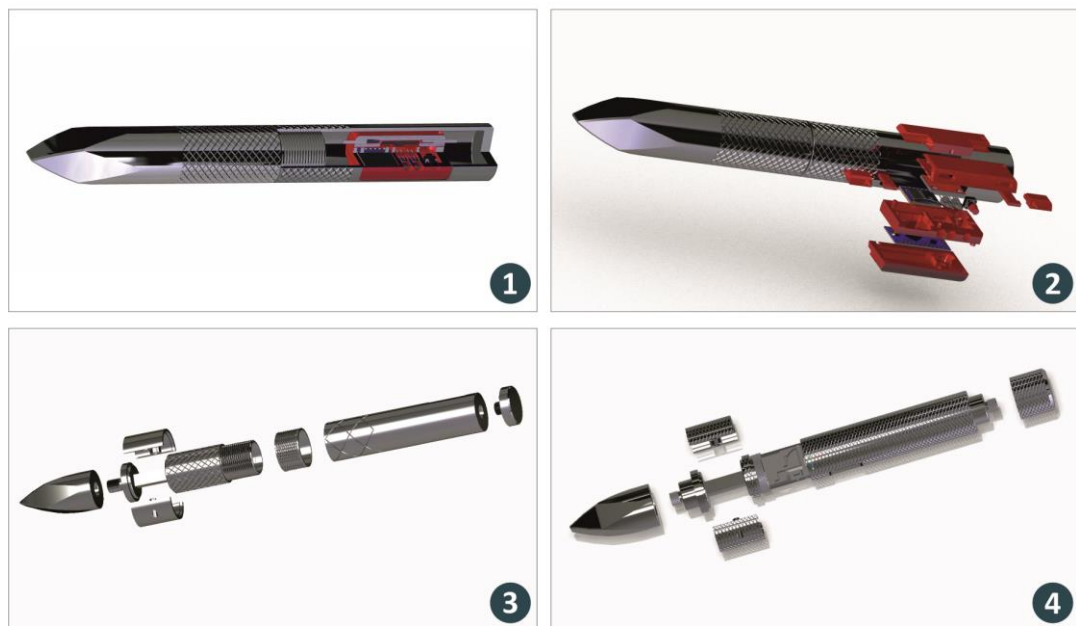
The smart carving tool design stages including the design of the first carving tool in semi dissected view (1) and exploded view (2) and the next two stages in fully exploded views (3 and 4)
